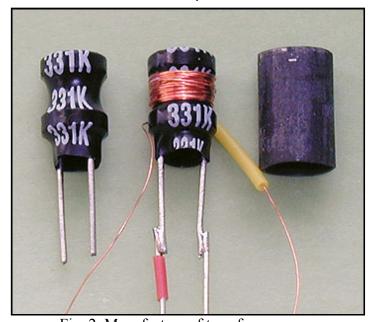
Manufacture of transformer Fig. 2. Secondary coil transformer winding
